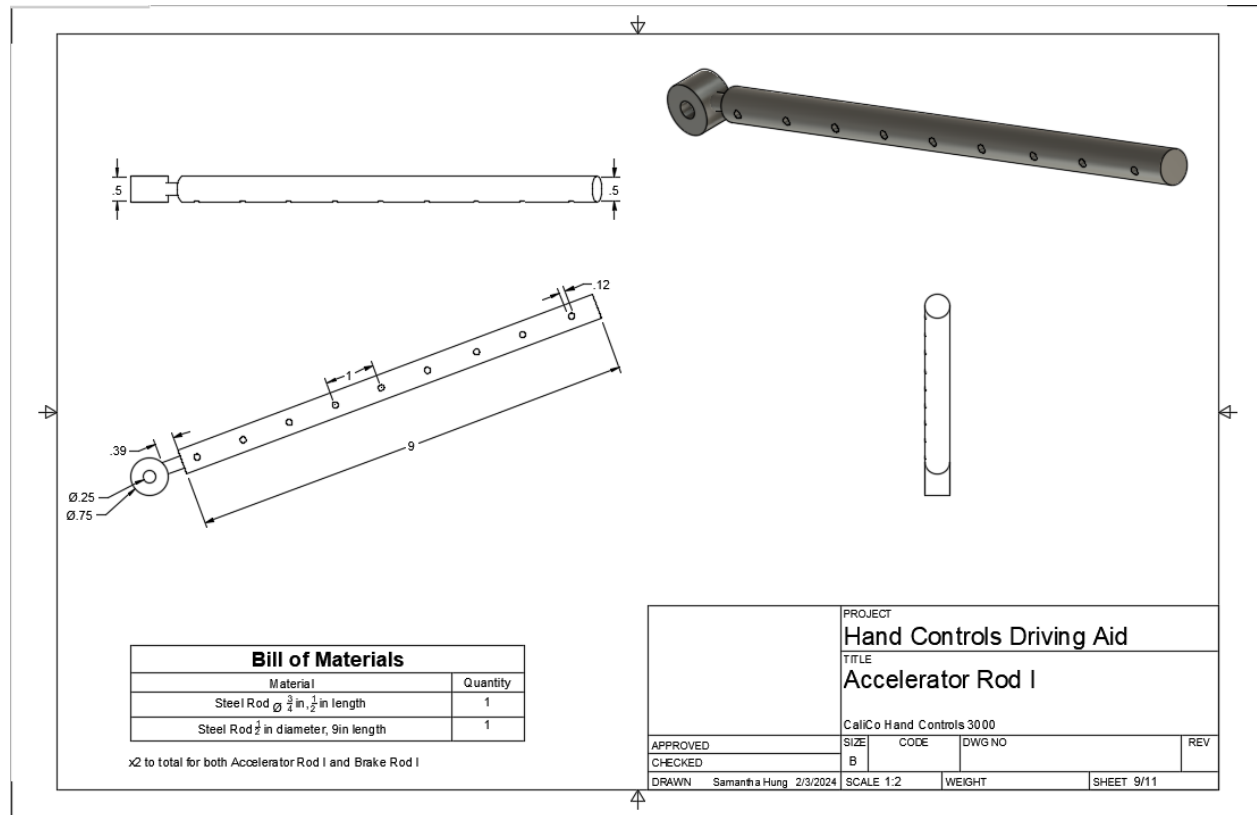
Detailed drawing and isometric view of the accelerator rod component
